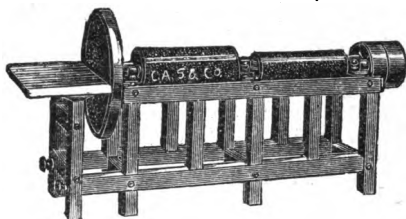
NO. 2 COMBINED DISC AND DRUM SANDER.
